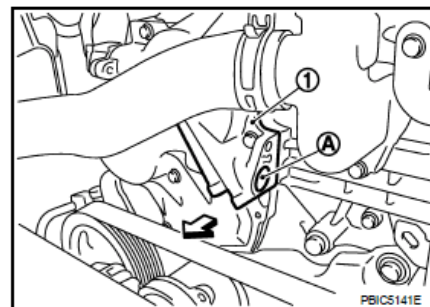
Identifying Valve Timing Control Solenoid Valve
